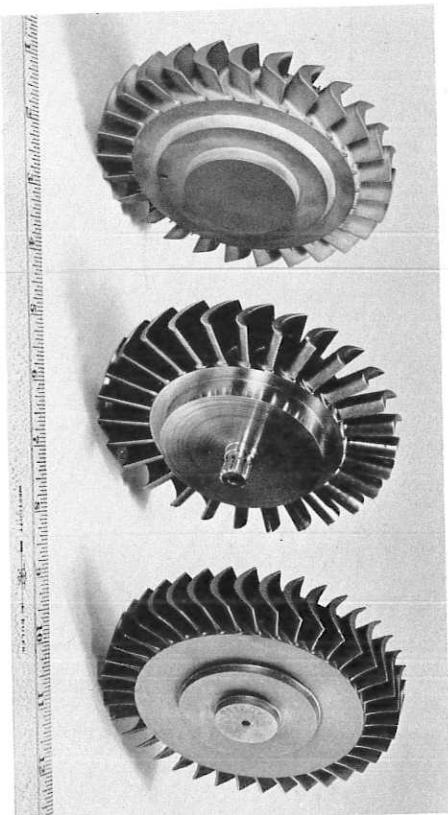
Integrally bladed turbine wheels electrochemically machined from waspalloy and titanium forgings. In operation a tool moves in radically to generate one airfoil; the wheel is then indexed. While wheels take under 3 hr to process, because of the many tool passes which have to be made, multielectrodes can be used to process several wheels simultaneously to achieve low manufacturing costs. Tooling is patented by Garrett-AiResearch. (Courtesy of the Garrett-AiResearch Manufacturing Company of Arizona.)
